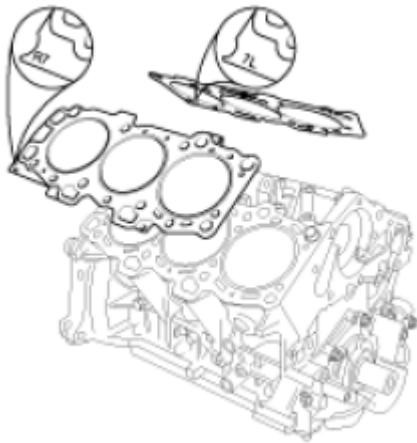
Identifying Cylinder Head Gasket On Cylinder Block
